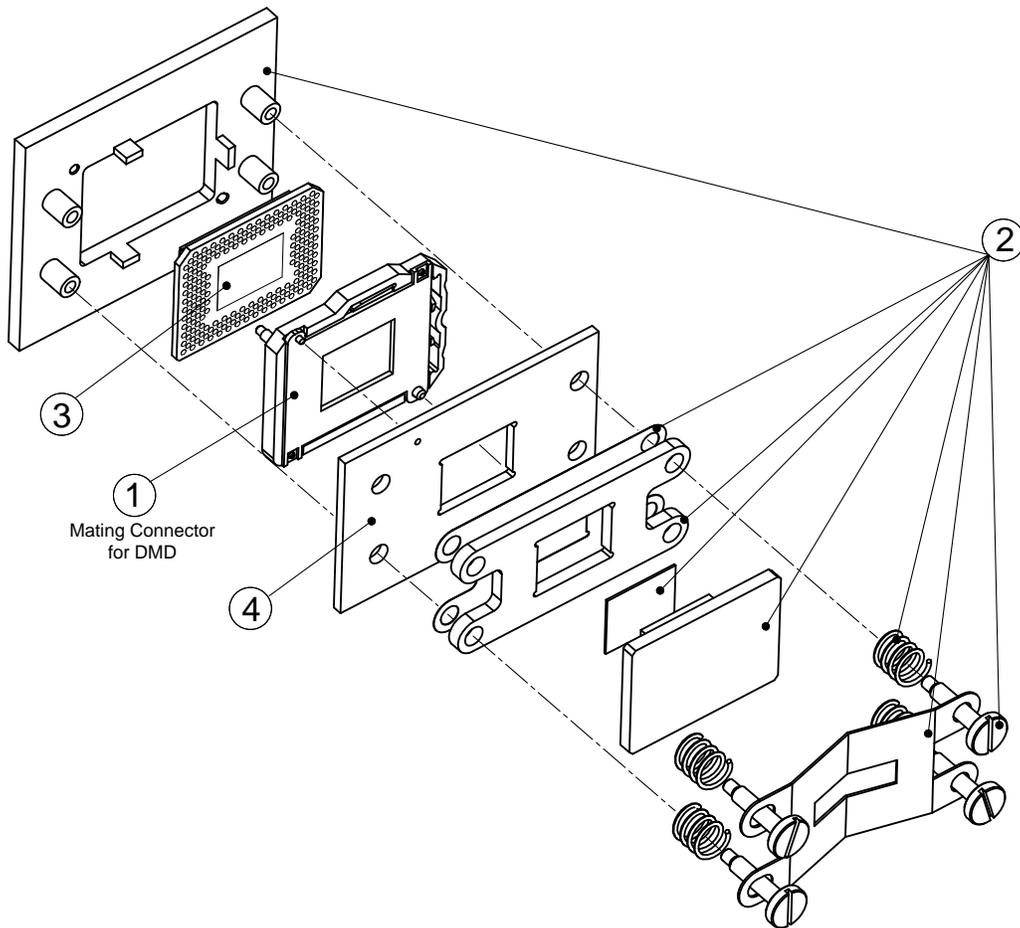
Exploded View of Mounting Concept for .7" Size Ceramic Type-A
